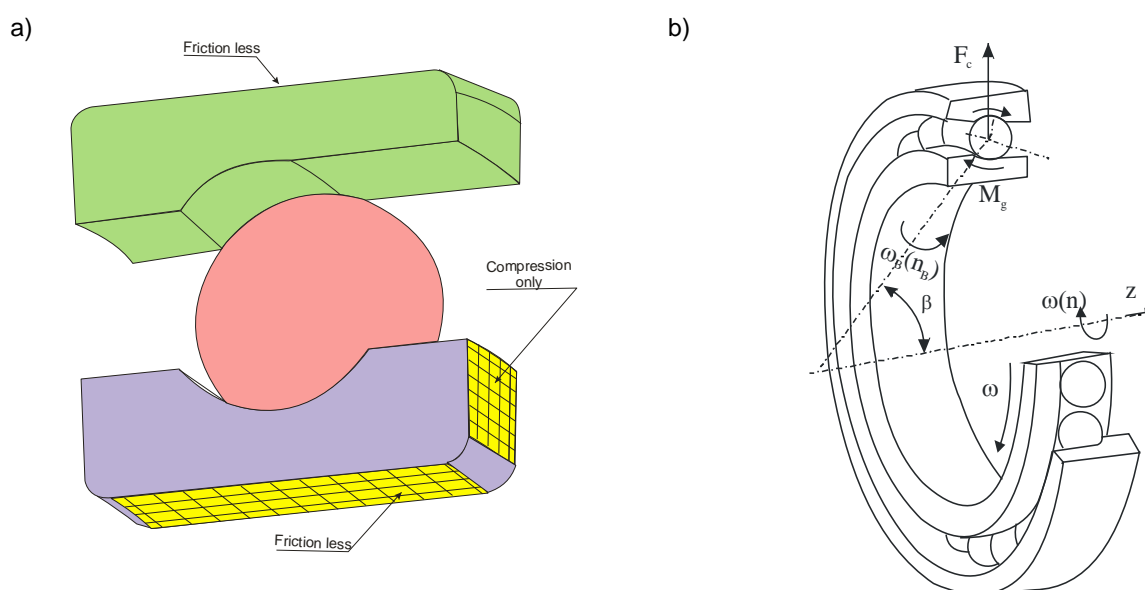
Modeling of bearing: a) model CAD of an angular bearing FAG B7013, b) geometric model of preload bearing
